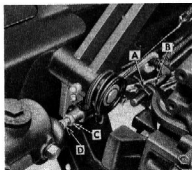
Clutch and Brake Pedal Travel Adjustment
